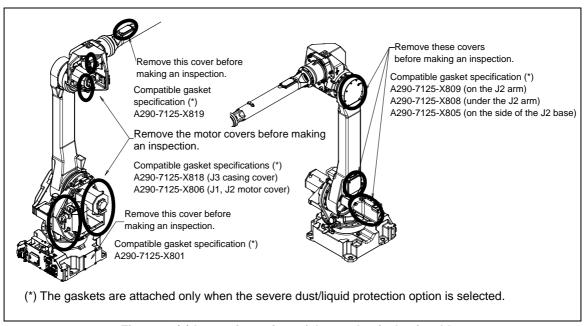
(a) Inspection points of the mechanical unit cables
